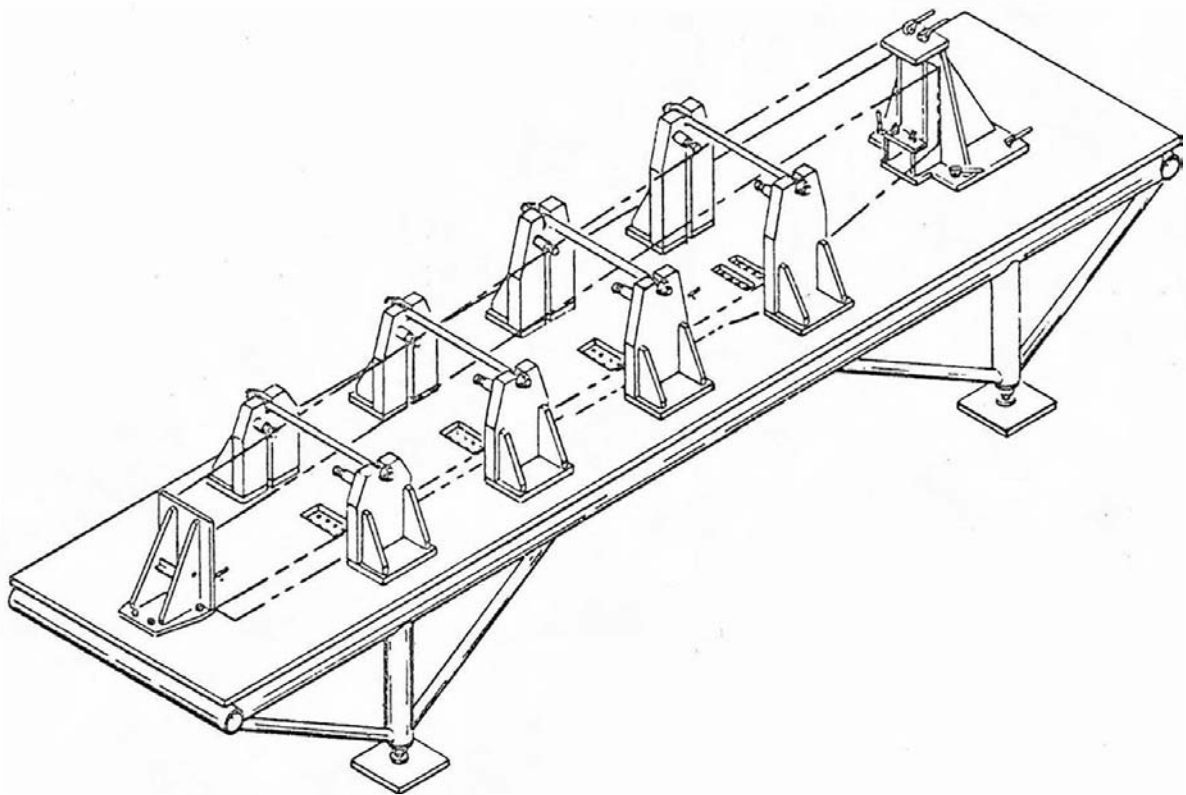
Outboard Thrust Post Assembly, Assembly Fixture
